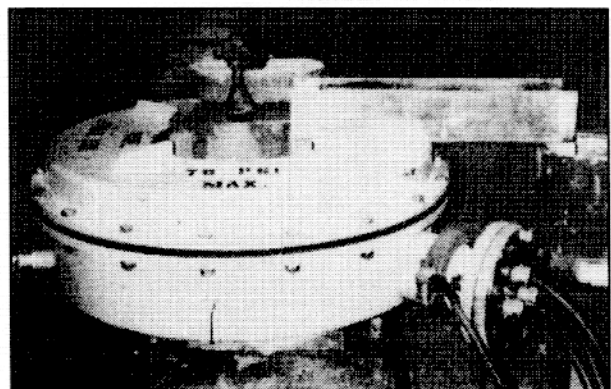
The Test Coil Enclosing Thermite Molds between Two 6-Inch Rail Samples
